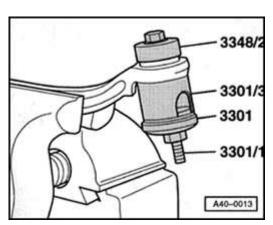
Pulling Out Bushing Courtesy of VOLKSWAGEN UNITED STATES, INC.
